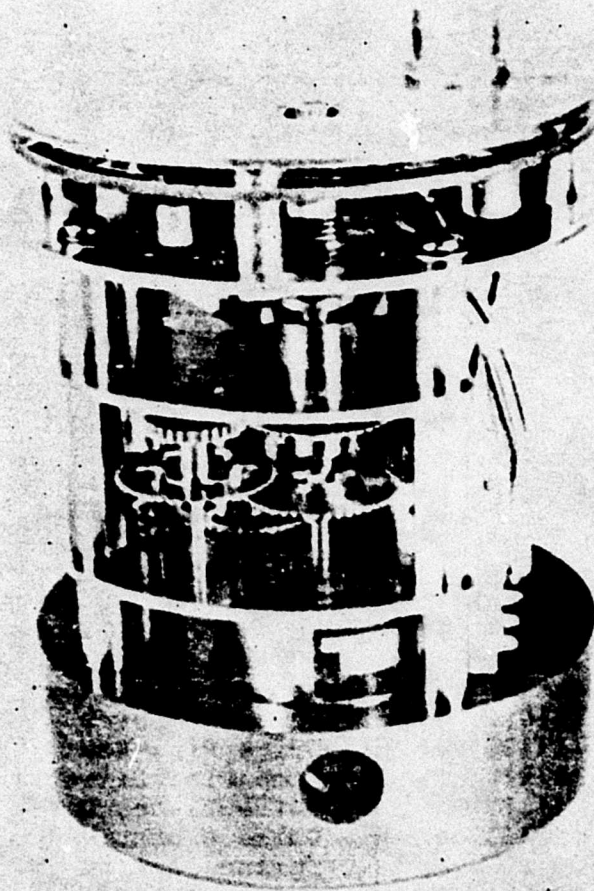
FMT Mechanism Assembly-Fuze Rotor
